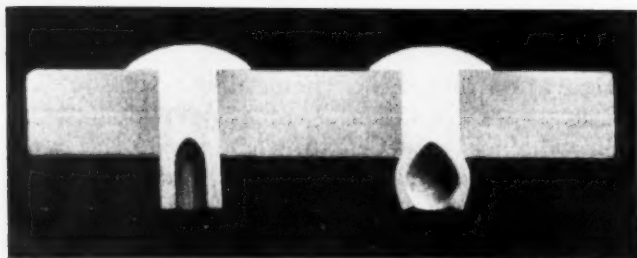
Reproduction of Section Photograph, Showing Explosive Rivet before and after Expansion
